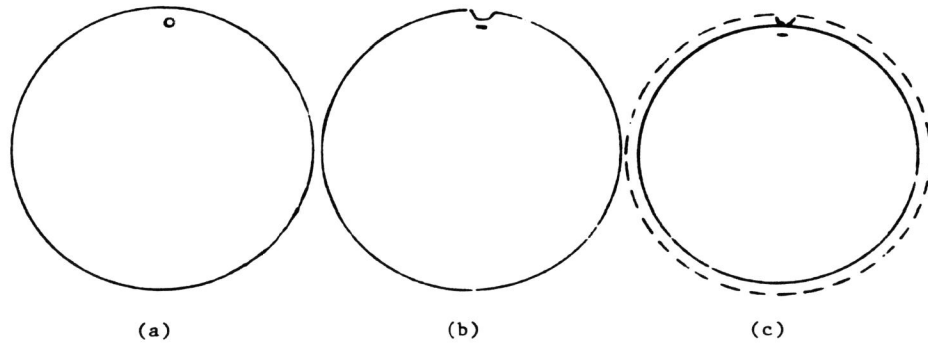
Procedure for inserting a crack-like defect below the rim of a rolling contact specimen: (a) drill small hole through disc, (b) indent rim collapsing hole, (c) remove indent by machining and heat treat specimen. (Yoshimura, Rubin and Hahn, 1984).
